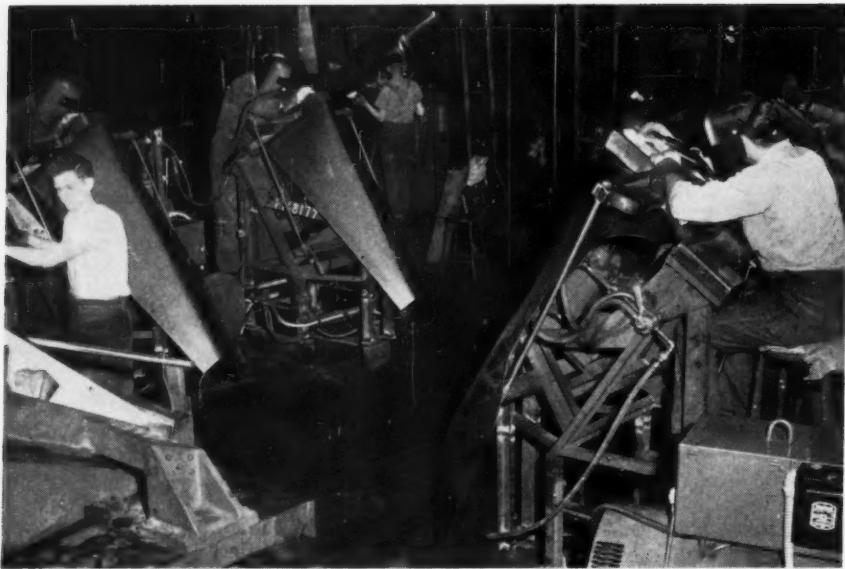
Manpower and equipment required when welded fabrication of fenders as shown in Fig. 1 was first introduced
